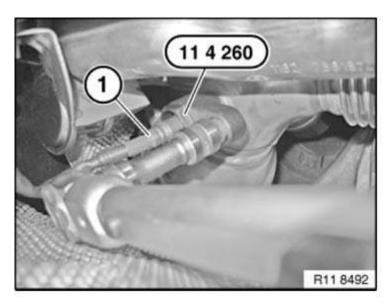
Releasing Control Sensor Using Special Tool 11 4 260 Courtesy of BMW OF NORTH AMERICA, INC.
